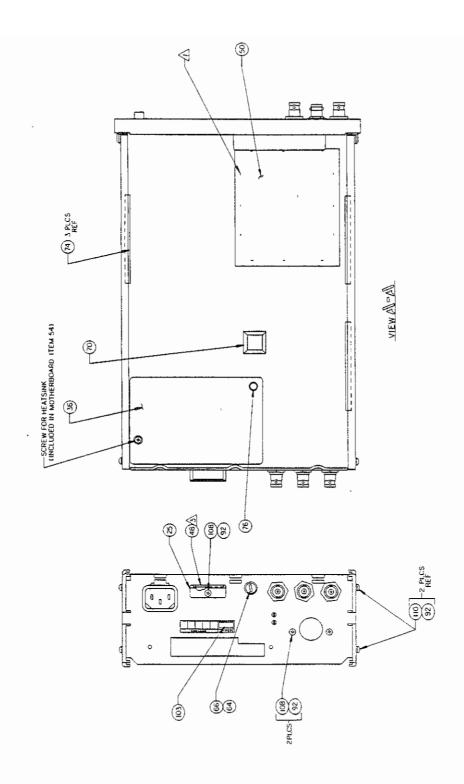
B - Chassis Assembly (404506) (Cont'd)
